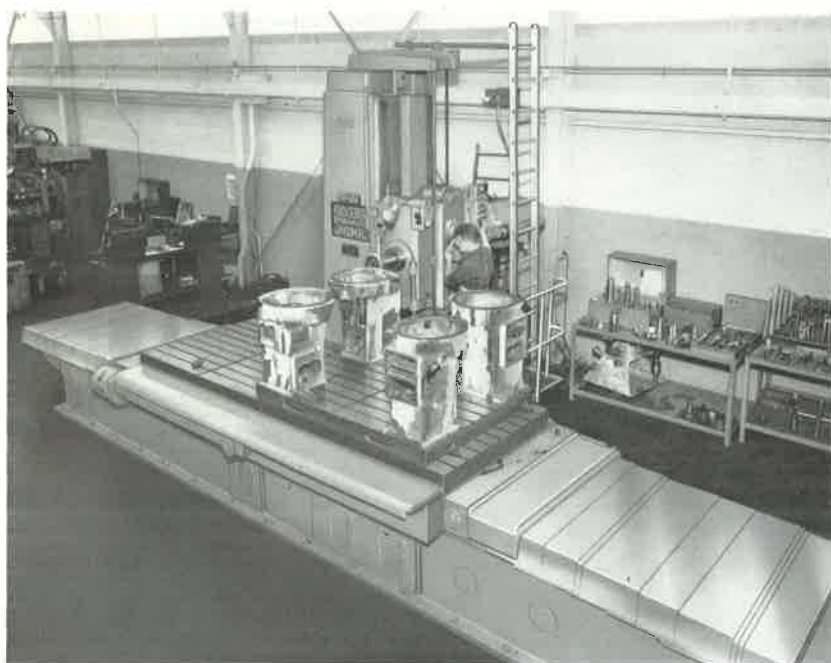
, above. Rough and finish boring and milling of air conditioning compressor housing.
